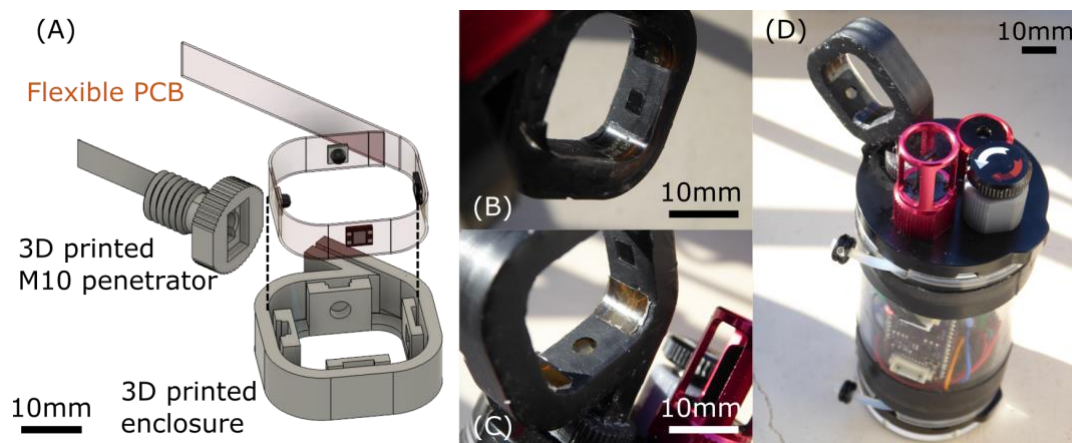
(A) CAD illustration of the GLI-2 sensor, with the flexible PCB hosting the two IR LEDs and the two photodiodes, the 3D printed enclosure and a 3D printed M10 penetrator that makes the sensor compatible with Blue Robotics waterproof enclosures. (B) and (C) Close-up pictures of a photodiode and a LED optical port respectively, after the PMDS overmolding step, to illustrate the good transparency and optical properties obtained with our method. (D) Implementation for in-situ deployment, with the electronics and LiPo battery protected behind a Blue Robotics 2-inch diameter enclosure, showing the GLi-2 sensor head as well as additional pressure (depth) and temperature sensors.
